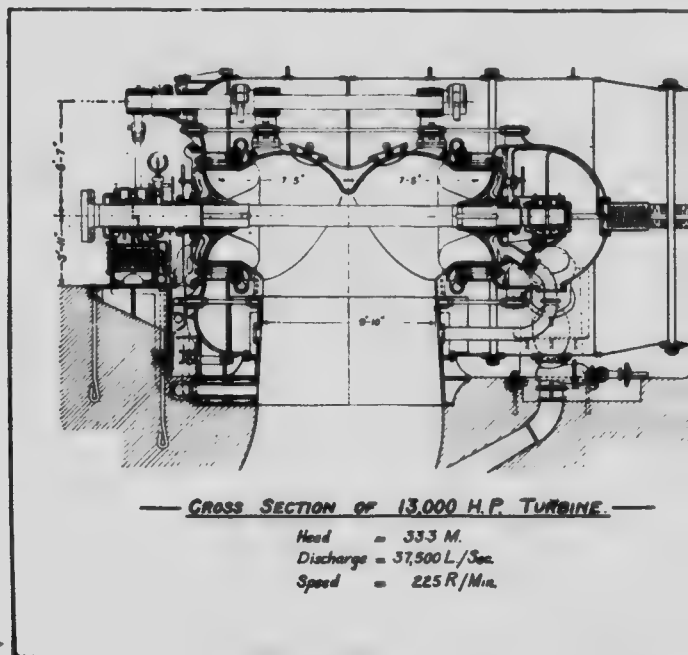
Cross Section of 13,000 H.P. Turbine.
